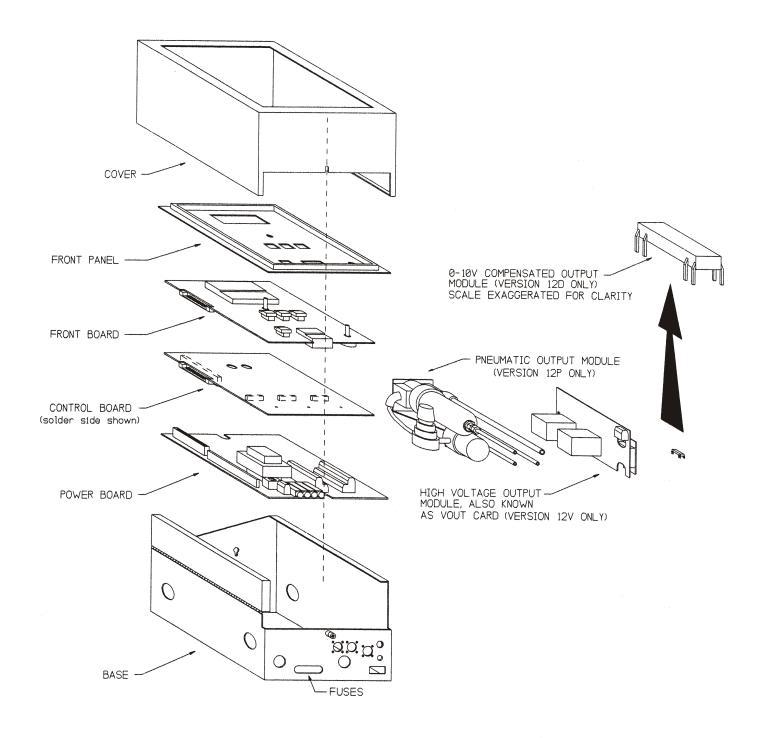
STEADYWEB CONTROLLER - EXPLODED VIEW
